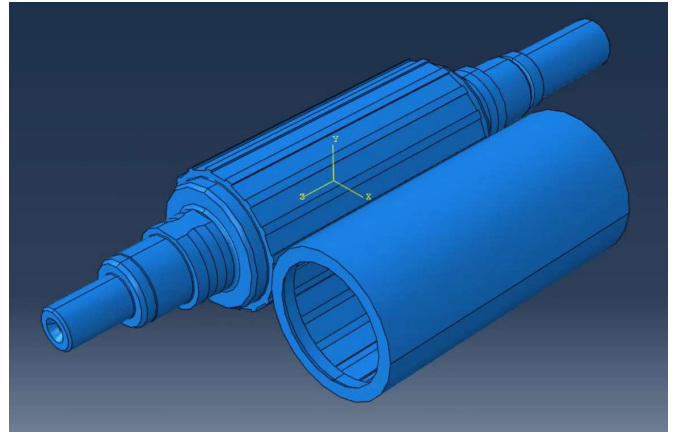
Bi-layer rotor of an induction machine operating at 36,000 rpm
